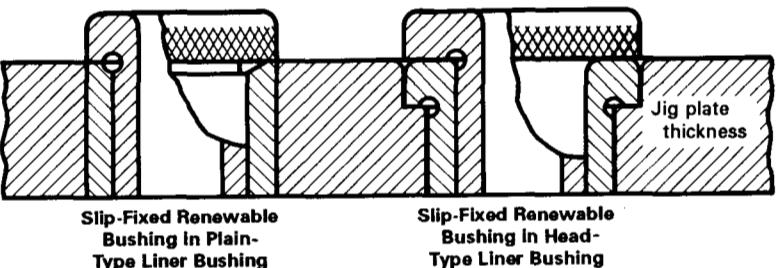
PLAIN-TYPE AND HEAD-TYPE LINER BUSHINGS
